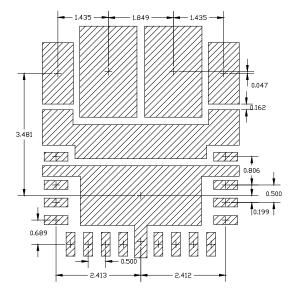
PCB Metal Pad Spacing (Dimensions in mm)
